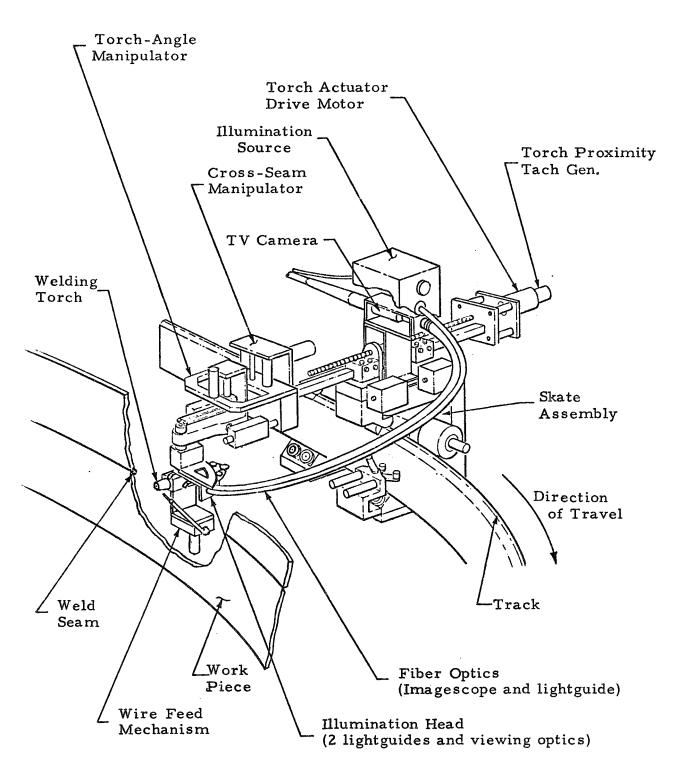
Computerized Welding Skate with CCTV Arc Guidance
